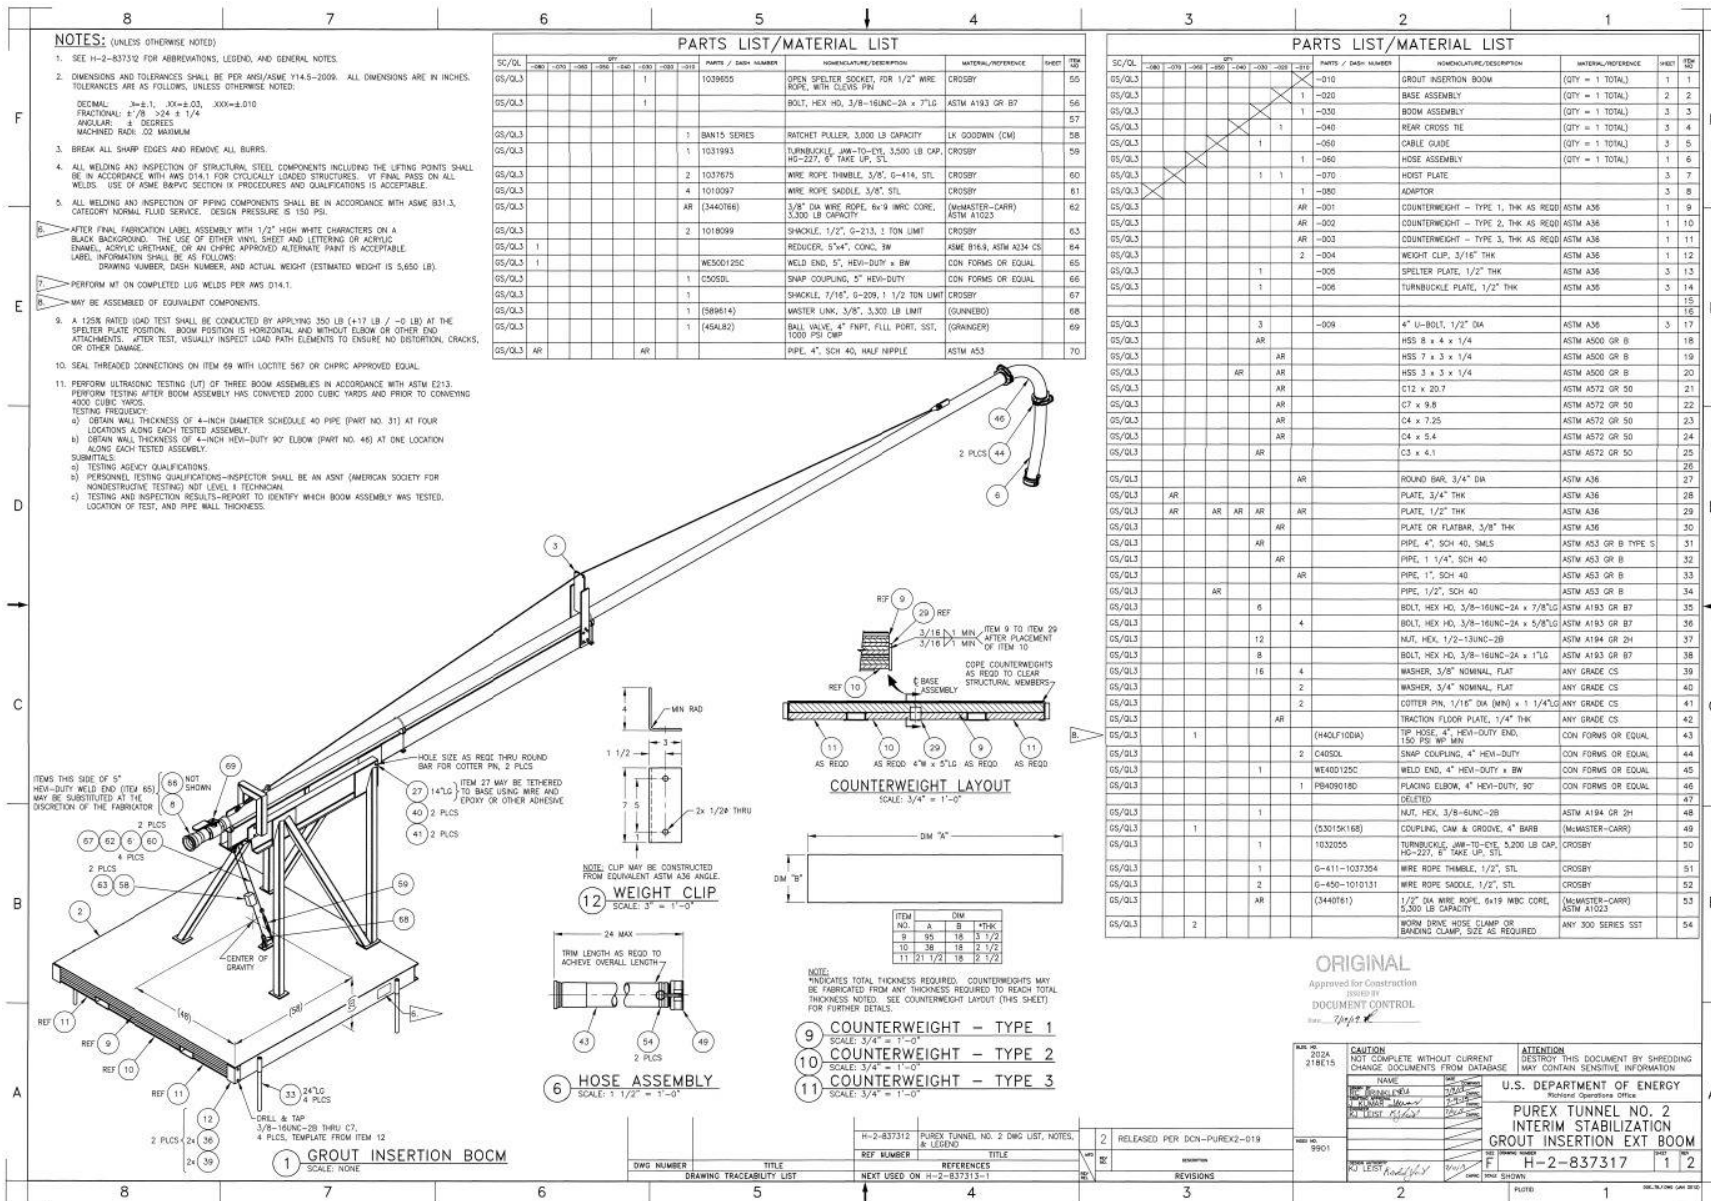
PUREX Tunnel No. 2 Interim Stabilization Grout Insertion EXT Boom, #H-2-837317
